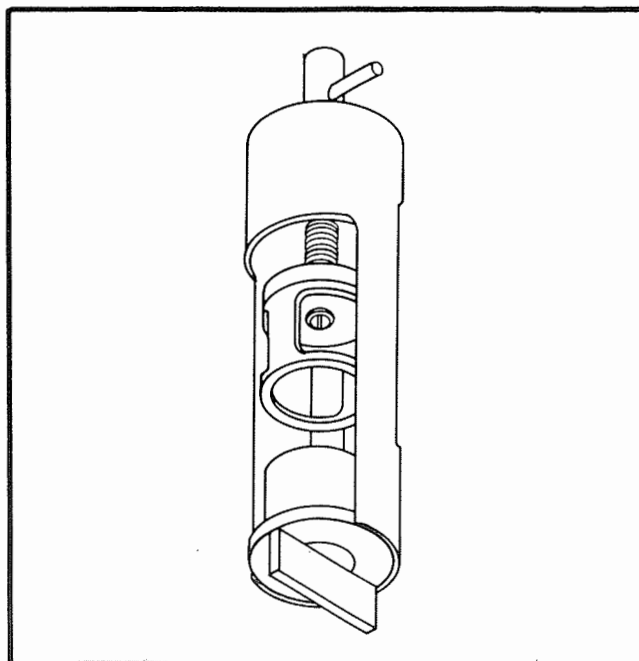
Rear Oil Pump Pressure Strainer Disassembly and Assembly Fixture
